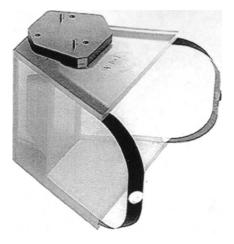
A 10-cm (3.94 in.) aperture penta mirror subassembly made by optically contacting Cer-Vit components. (From Yoder.¹⁵)
